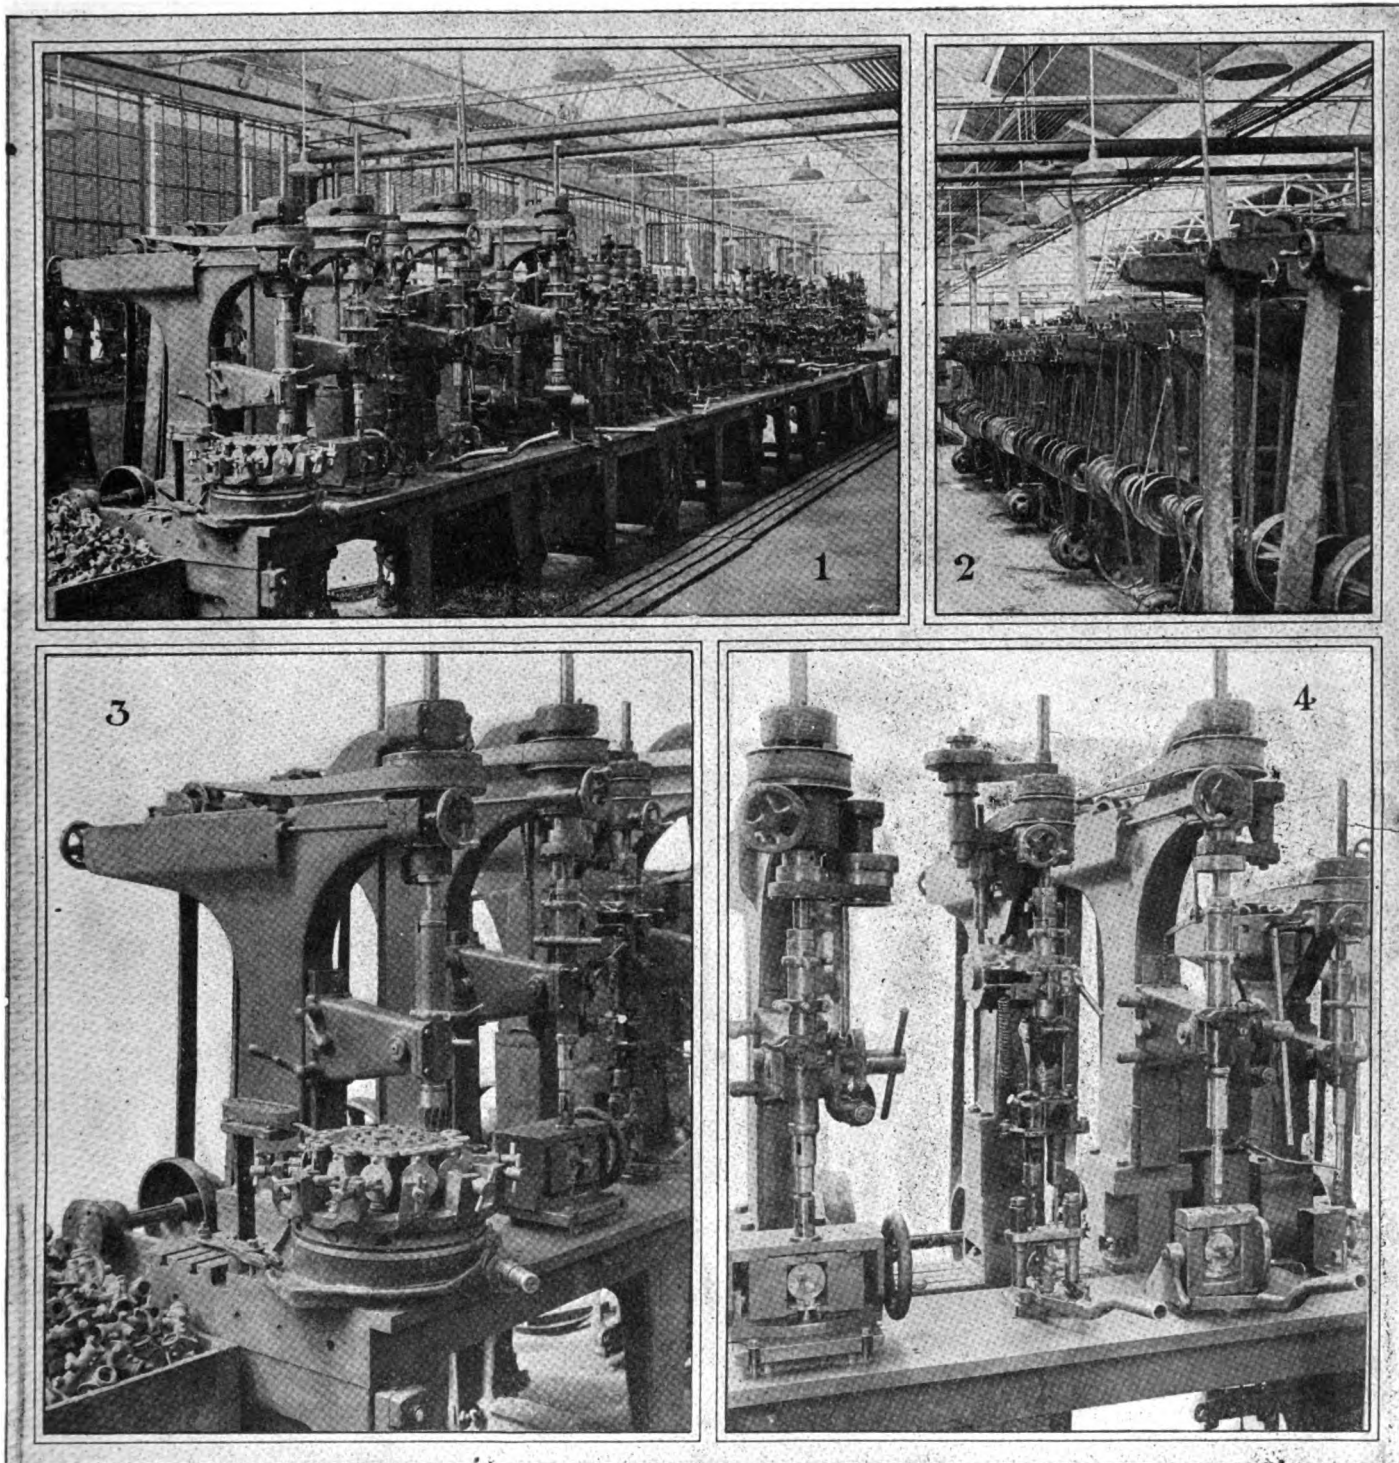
Single table unit at Holley Manufacturing Co. capable of turning out 150 mixing chambers per hr. This unit is 50 ft. in length and takes care of thirty-six operations with twenty-one men. It is equipped with standard Avey drill press heads capable of being moved along the table to suitable positions for manufacture. Fig. 2—Back of Holley drill head installation, showing power drive. Shaft is provided with keyway to allow pulleys to be shifted along the line to accommodate the positions of the drill heads. Fig. 3—Operations 1, 2 and 3. Milling fixture at end is a continuously rotating type from a Cincinnati milling machine holding twelve mixing chambers at a time. Fig. 4—Operations 2, 3, 4 and 5 in the manufacture of the Holley carburetor mixing chamber
